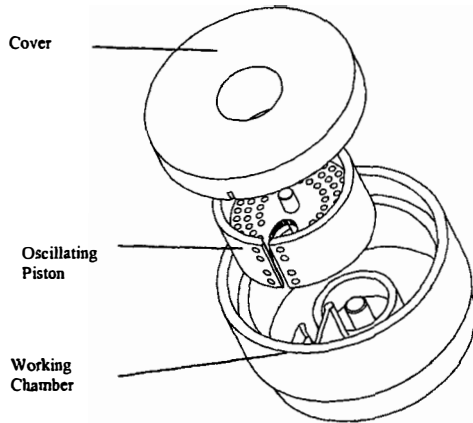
3D view of Working Chamber and Oscillating Piston
